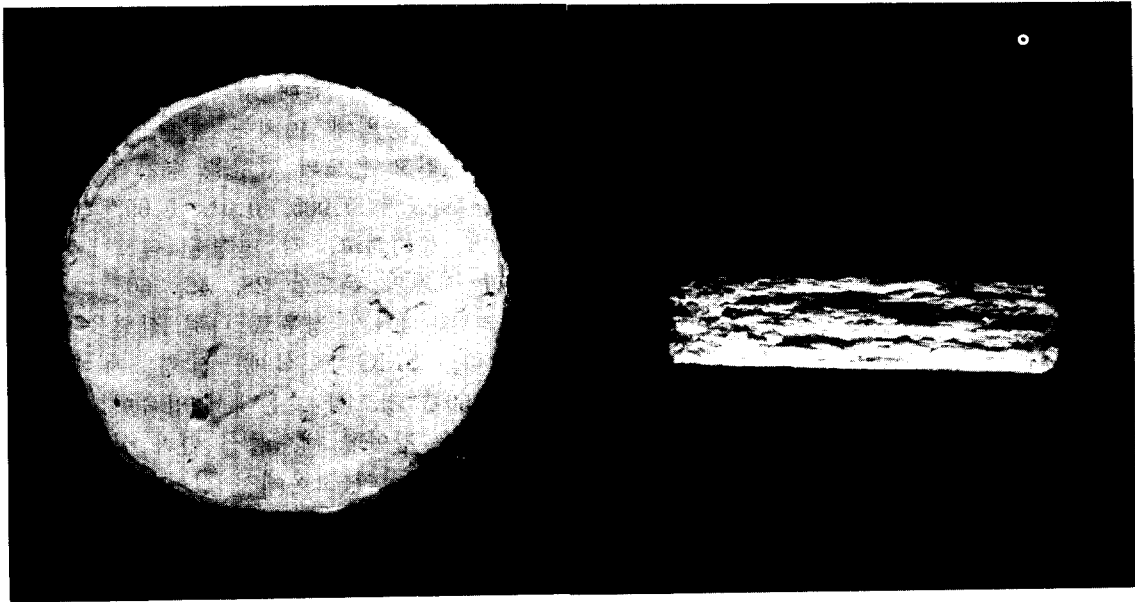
Top and side views of the initial 4-layer cylindrical SMC charge with a diameter of 32.4 mm and height of 9 mm
